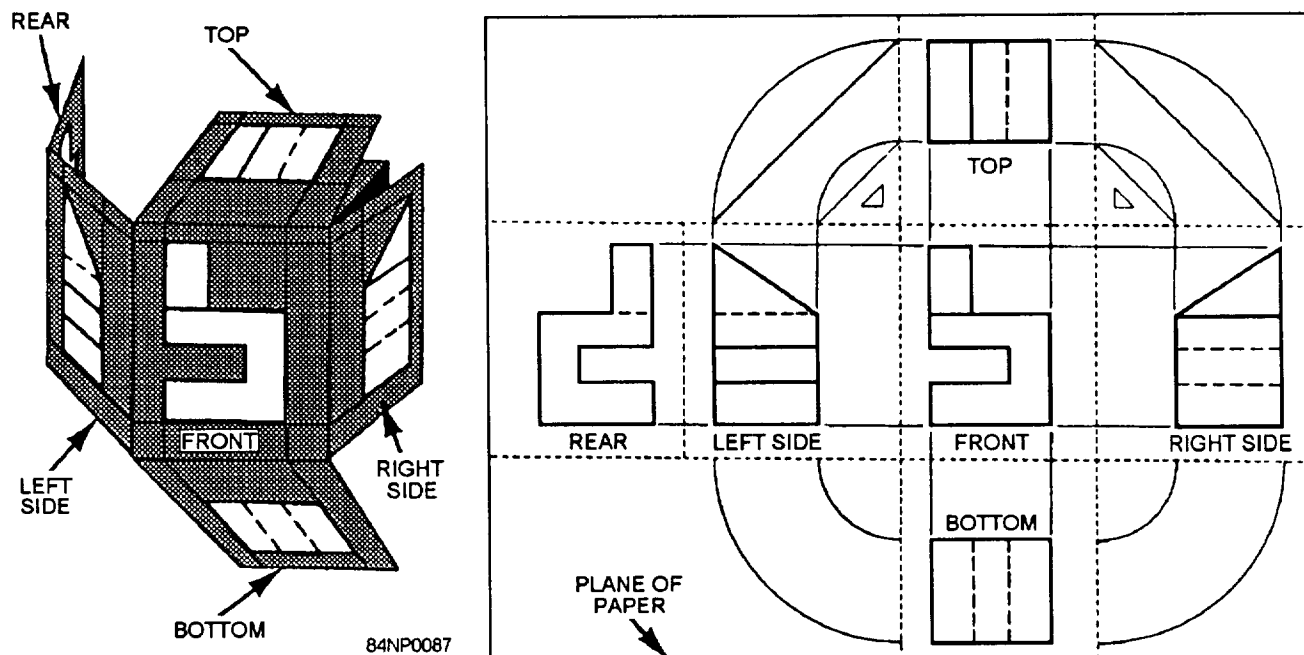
American standard arrangement of views in a six-view third-angle multi-view projection.
